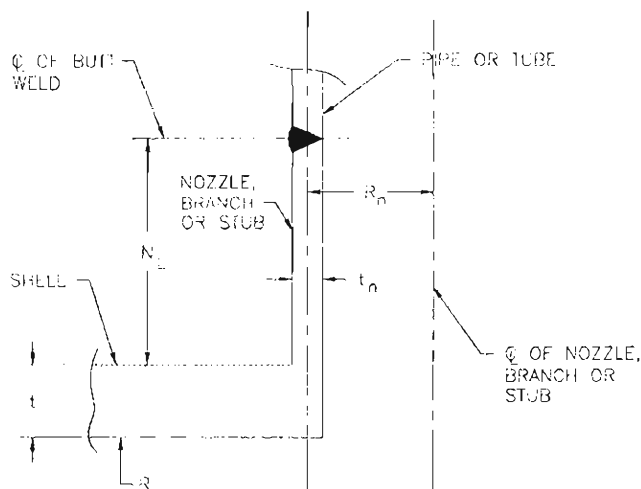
Schematic diagram used by AS 1210 to specify requirements relating to the proximity of pipe-to-nozzle welds to the shell.
